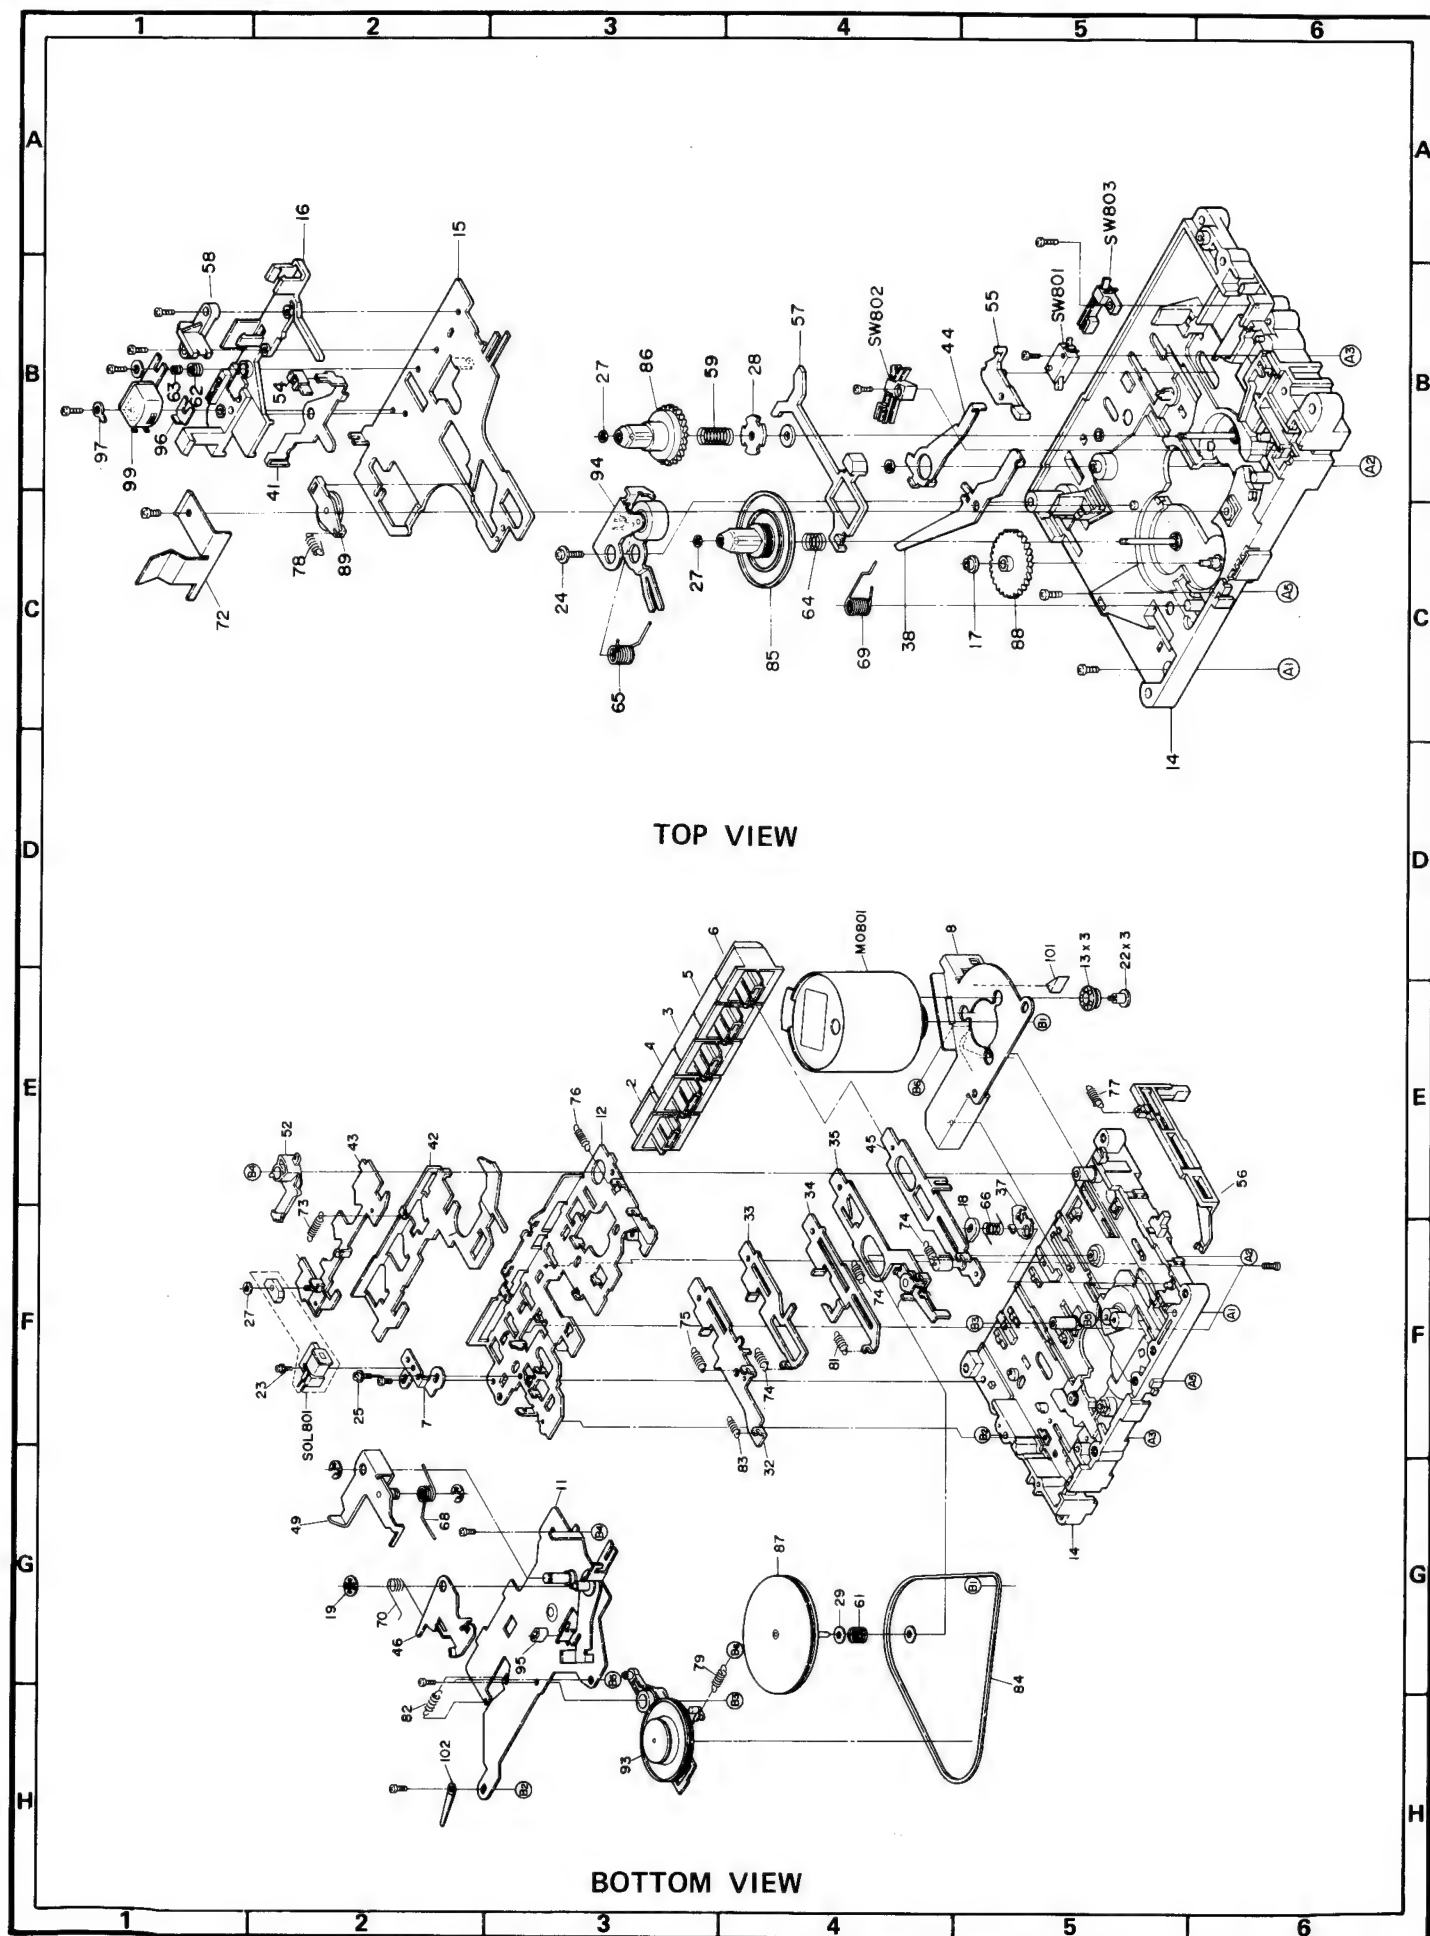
MECHANISM EXPLODED VIEW (DECK 1)
